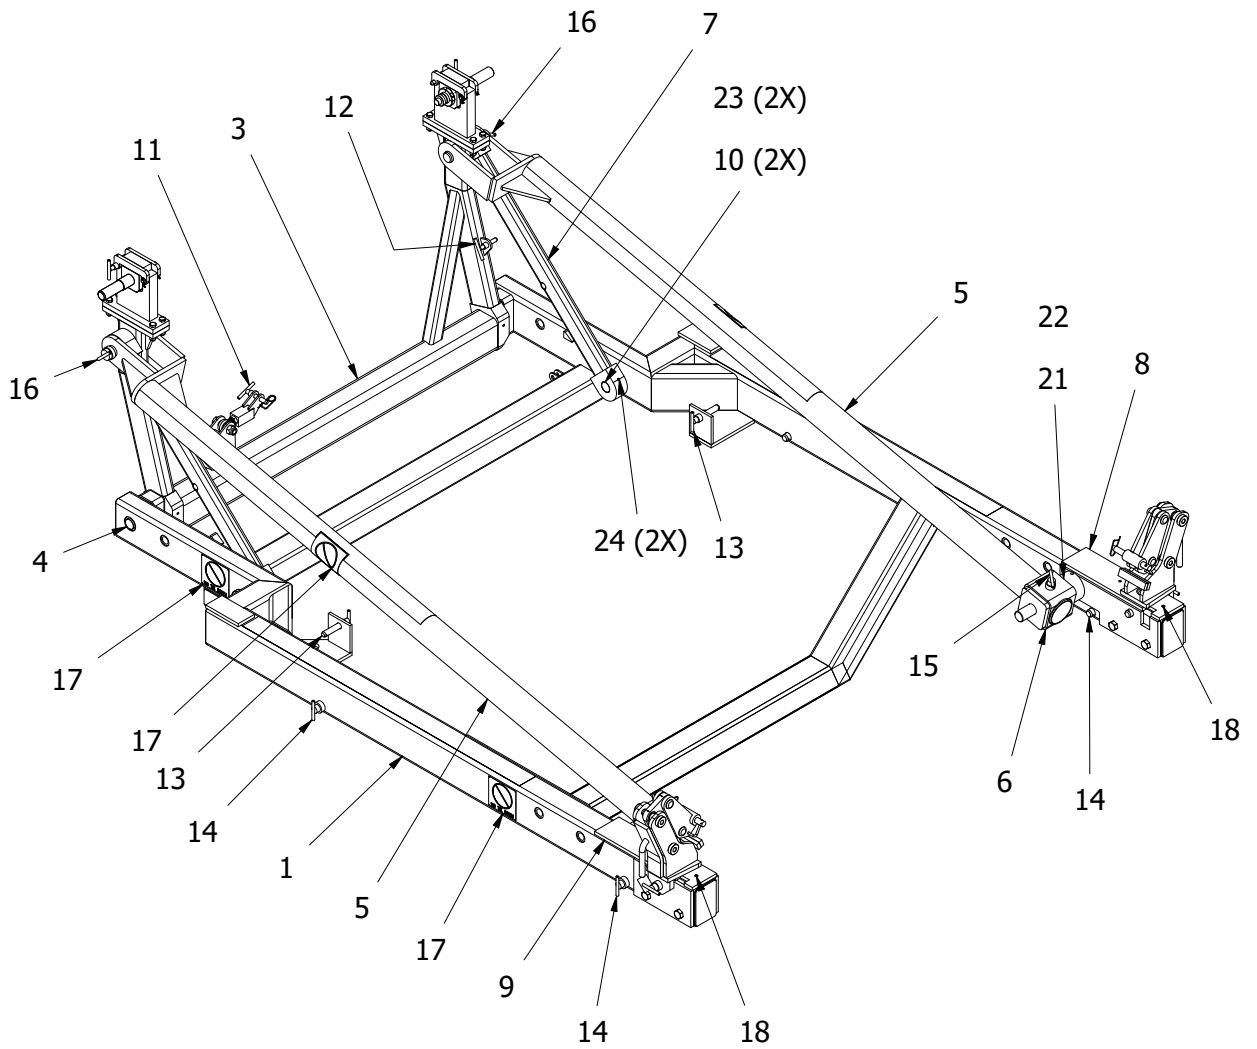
AM-1928-156-80E1 Cradle Assembly w/o Bootstrap Adapter for CF6-80E1
